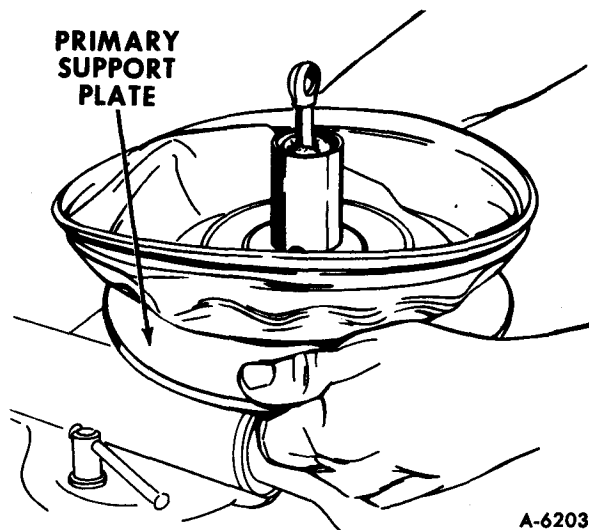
Locking or Unlocking Primary Support Plate from Primary Power Piston
